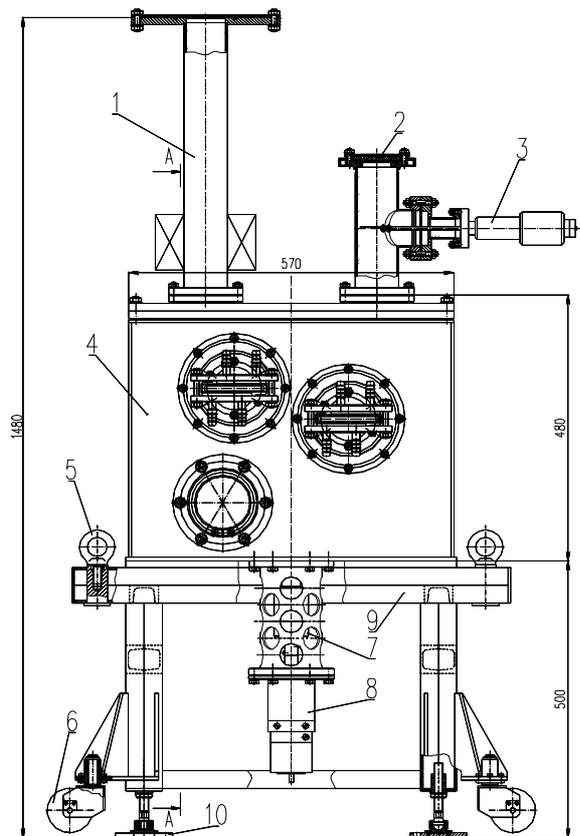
Prototype inside the vacuum chamber. 1 – drift tube of ELV-6 accelerator with focusing lens; 2 – optical window; 3 – movable shielding screen for window; 4 – vacuum chamber; 5 – set-up for lifting; 6 – wheels for set-up moving; 7 – rotating feed-through; 8 – driving DC motor; 9 – support; 10 – support adjustment tool.
